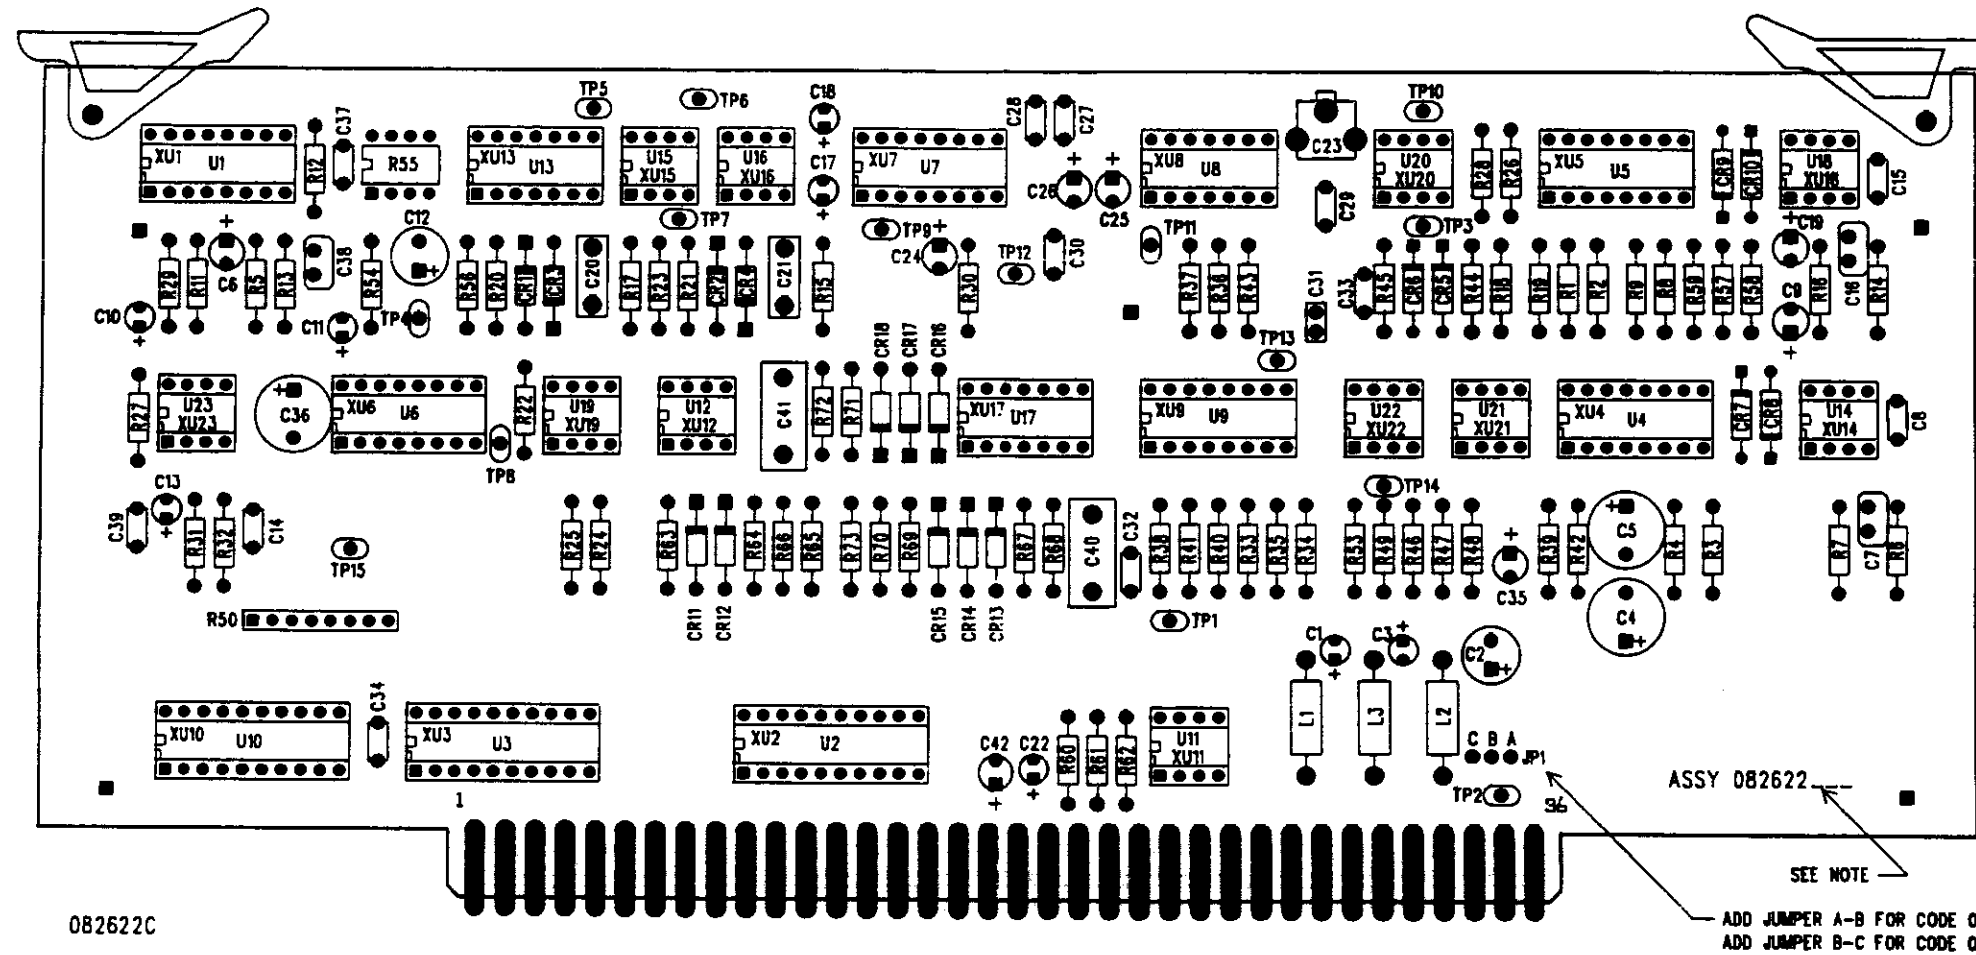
Distortion Analyzer, A7 Parts Location.
